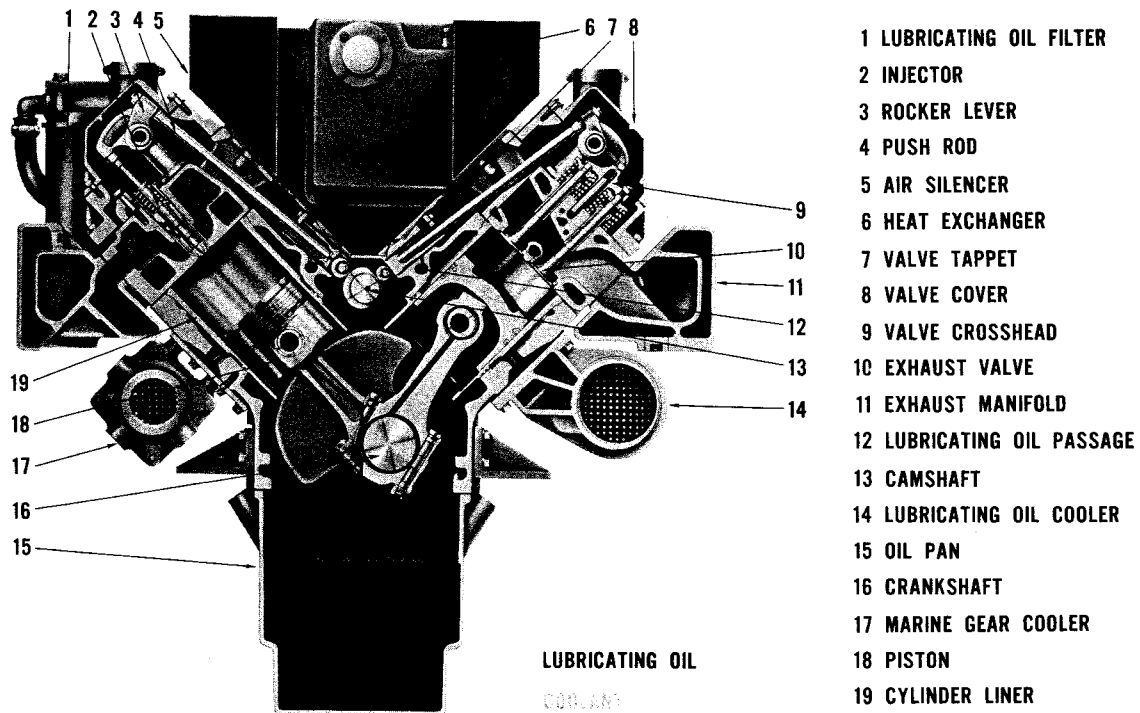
, (LWC-26). Lubricating oil and coolant flow — V-903 Engine
